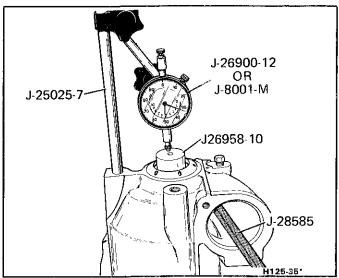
Final Drive End Play Selective Thrust Washer (680) Measurement
